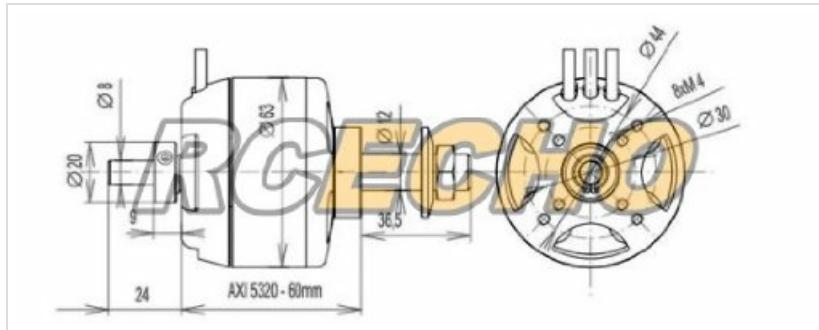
Technical drawing of the AXI 5320-60mm motor, showing key dimensions such as diameter, length, shaft diameter, and mounting hole patterns.
